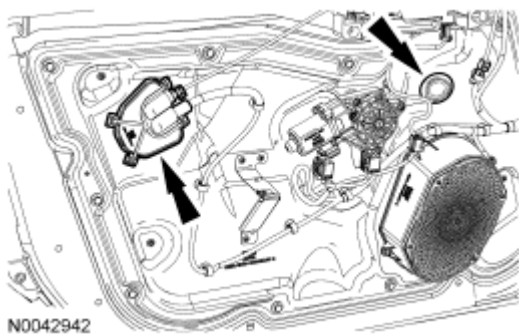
Locating Wiring Harness Cover Plate And Access Hole Plug
